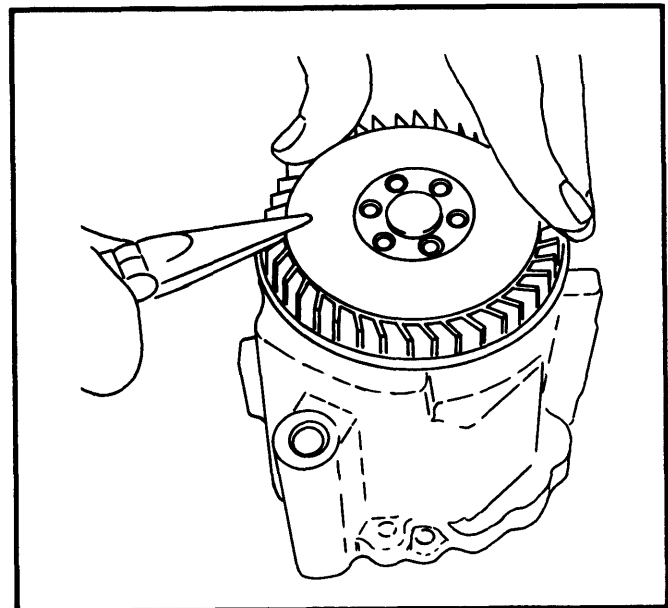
Removing Centrifugal Fan Filter from Air Injection Pump (Pulley Removed)
